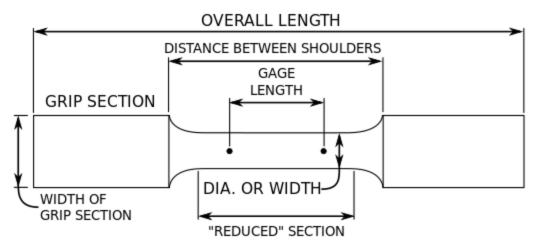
Typical Dog Bone Test Specimen [Tensile Testing]
